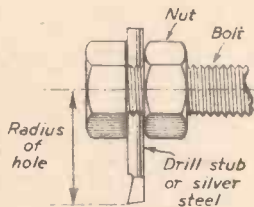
How the parts are assembled and how the boring diameter is set.
